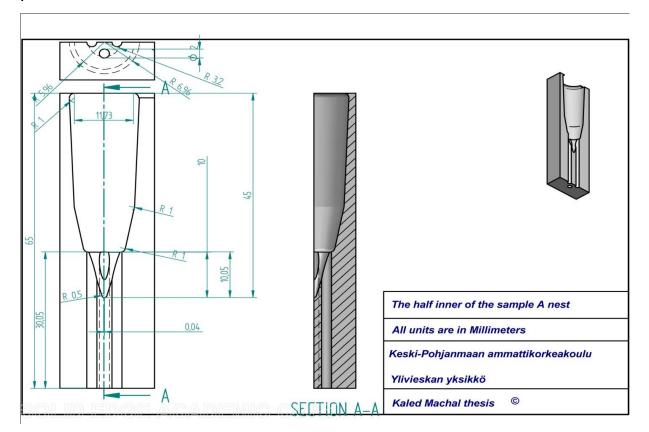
The drawing of the half cut out of the inner nest or cavity of the sample A
